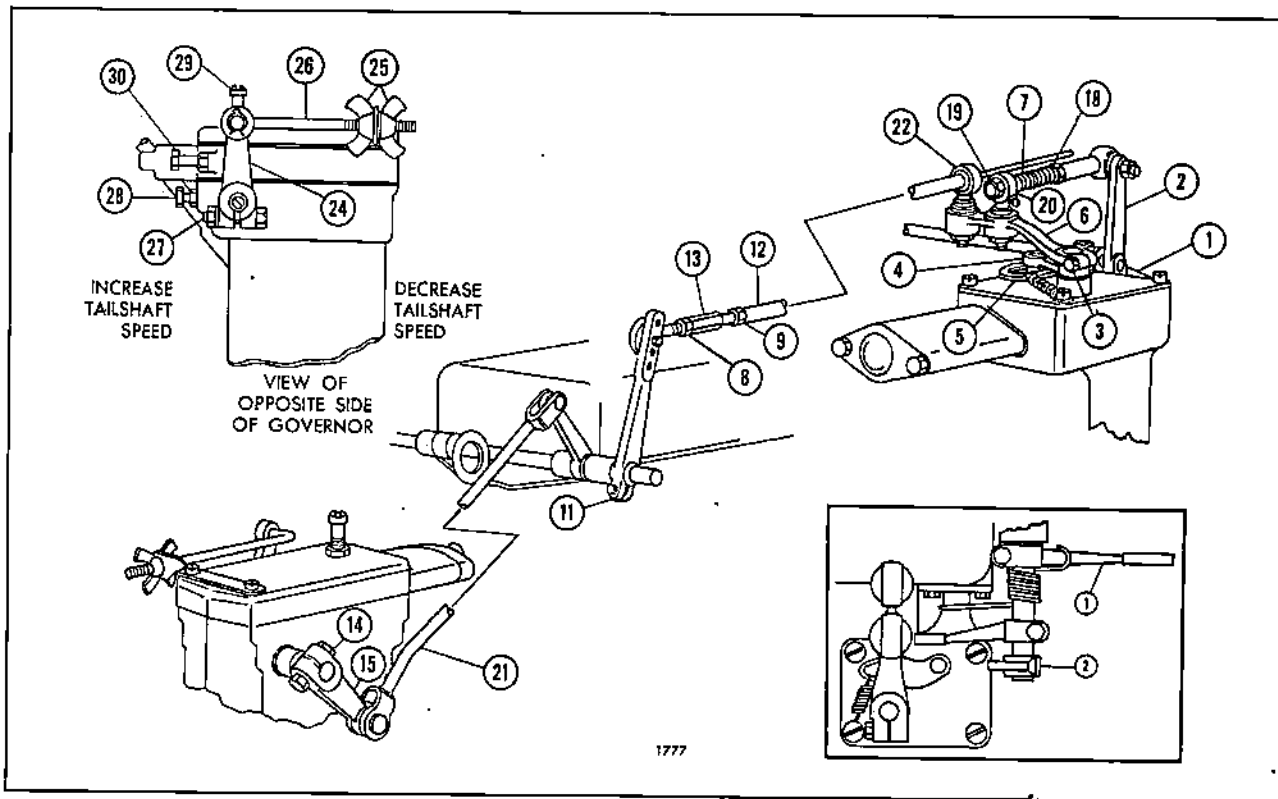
Hydraulic Output Shaft Governor and Linkage (Type B)
